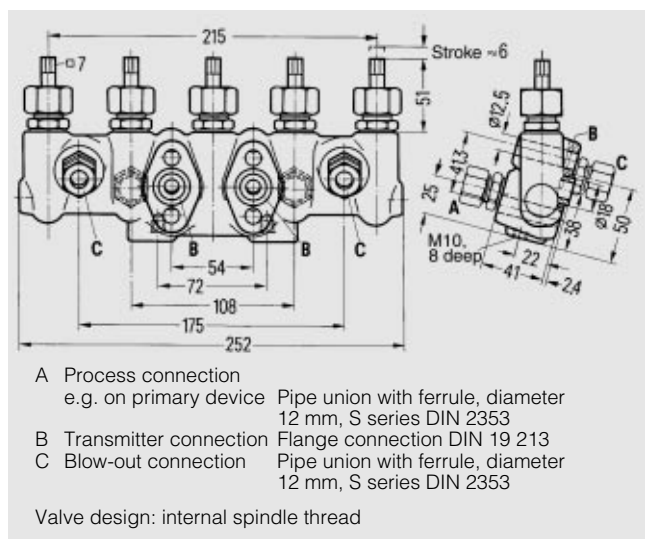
/67 Five-way valve manifold DN 5, dimensions
